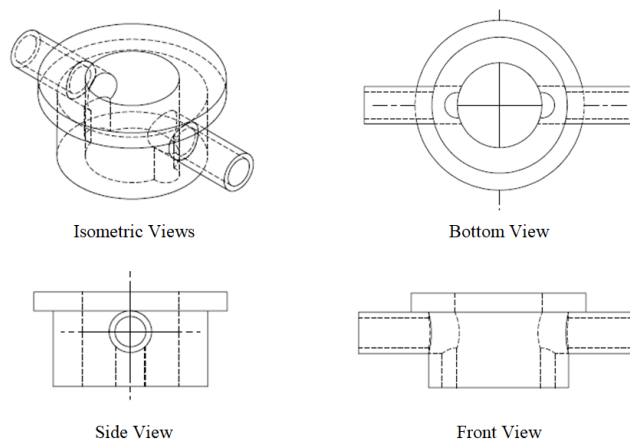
Different views of improved bush / sleeve, used in dental drill guide
